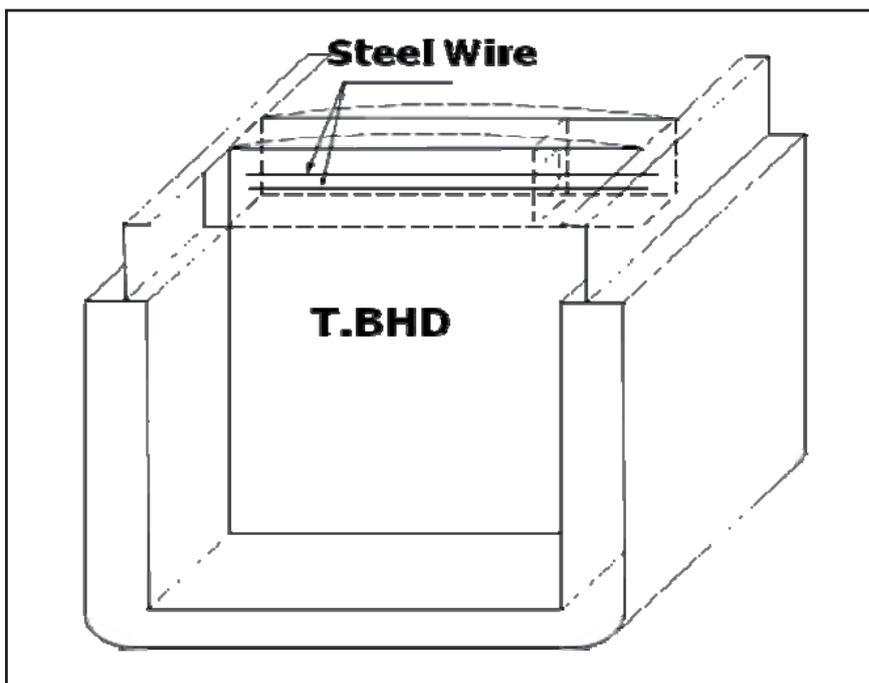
Measurement system of lateral deformation of transverse bulkhead by steel wire.
